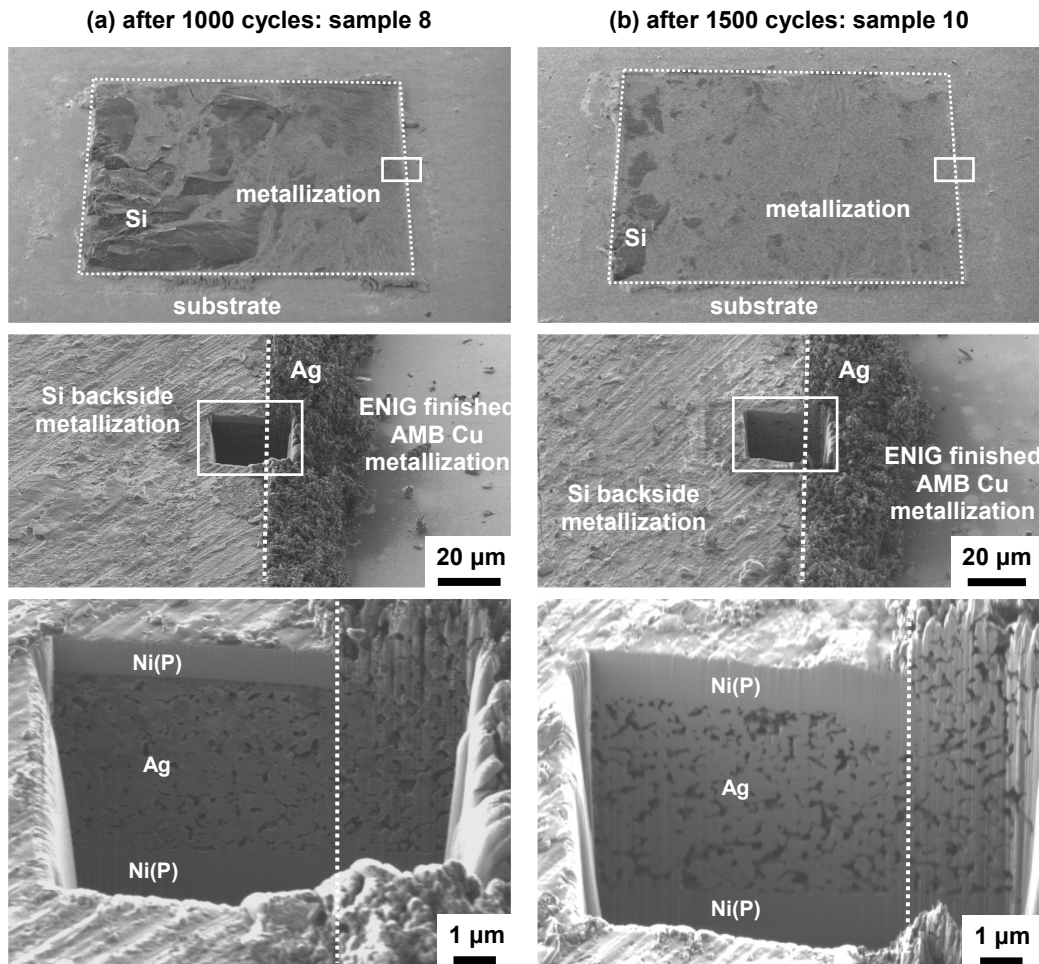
Focused ion beam (FIB) secondary electron (SE) images of tilted view of fracture surface (substrate side) and FIB-milled cross-sectional view on the edge parts of Ag nanoporous bonding layer under the fracture surface after temperature cycling for (a) 1000 cycles (*sample 8*) and (b) 1500 cycles (*sample 10*).
